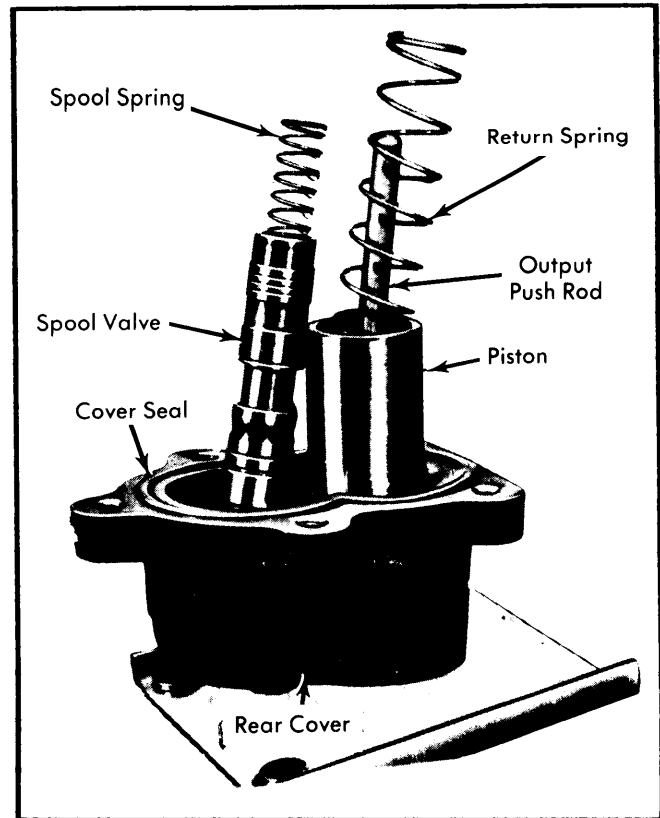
Booster Rear Cover Assembly Showing Spool Valve and Power Piston (Cadillac Shown)
